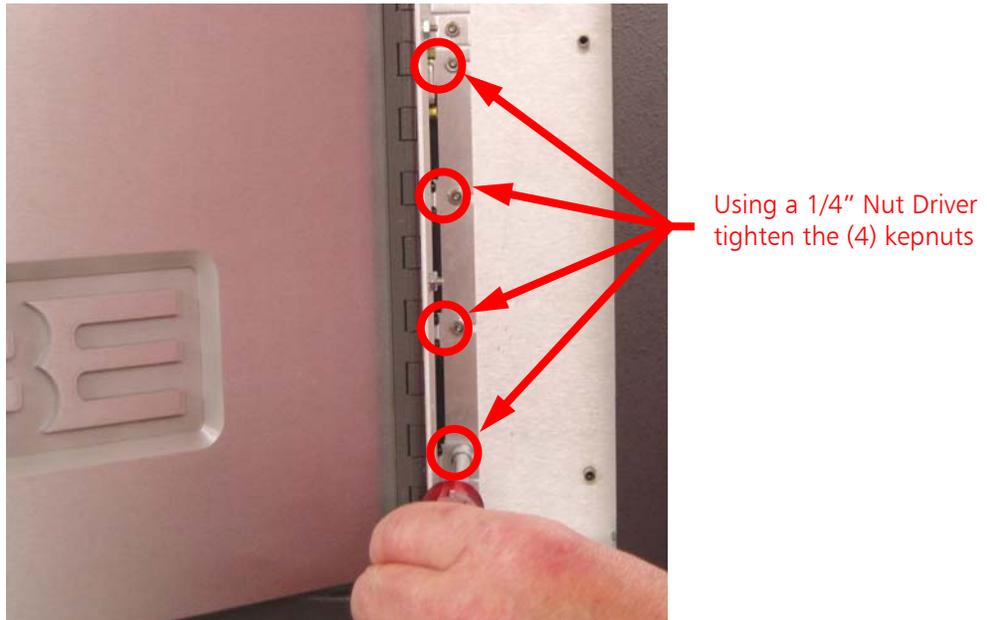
Tighten System Controller PCB Bracket Kepnuts
